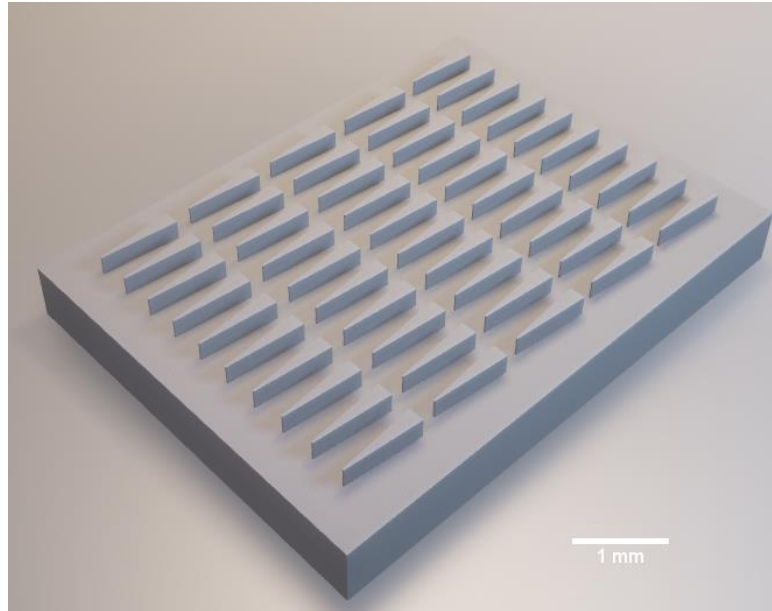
The isometric view of the final CAD drawing for the agar mold, which was 3D printed to work with zebrafish embryos in an automated processor.
